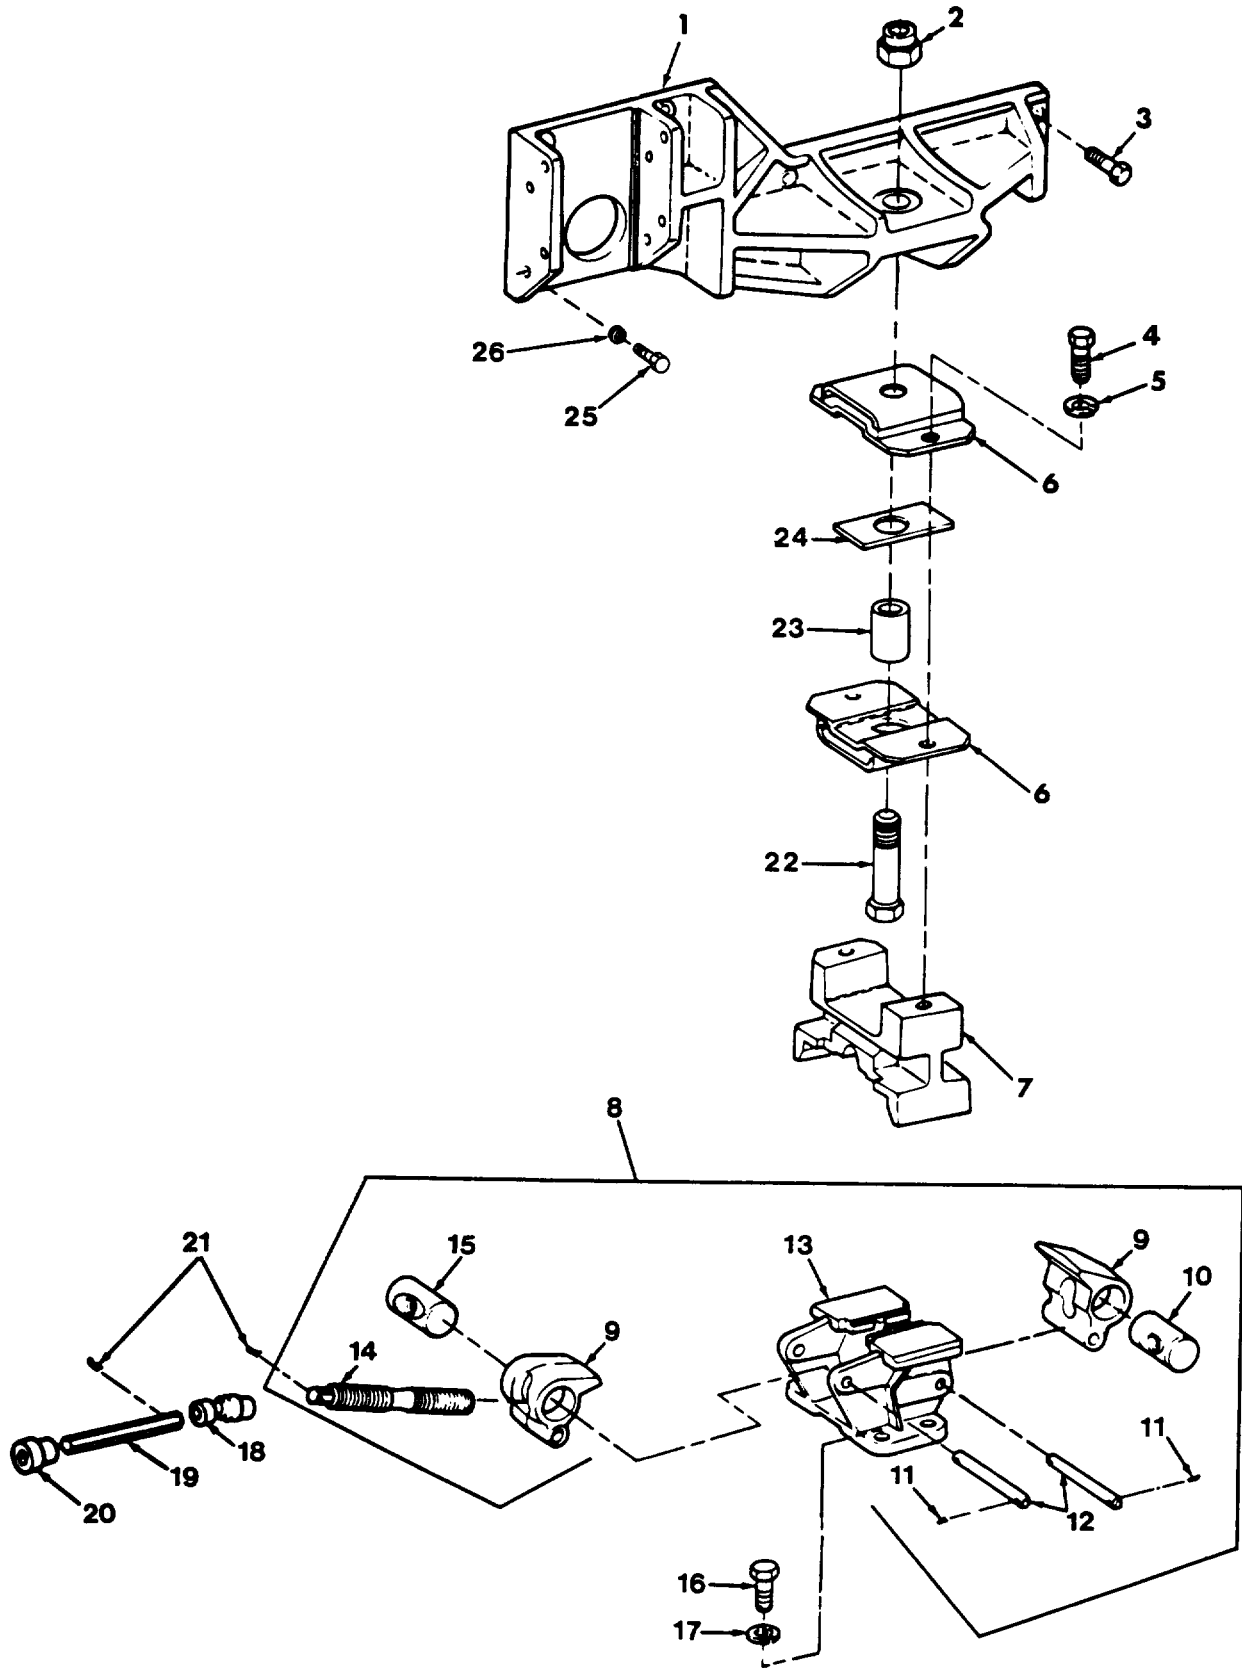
Engine Mounting Base Assembly 7527607, Mounts and Brackets
